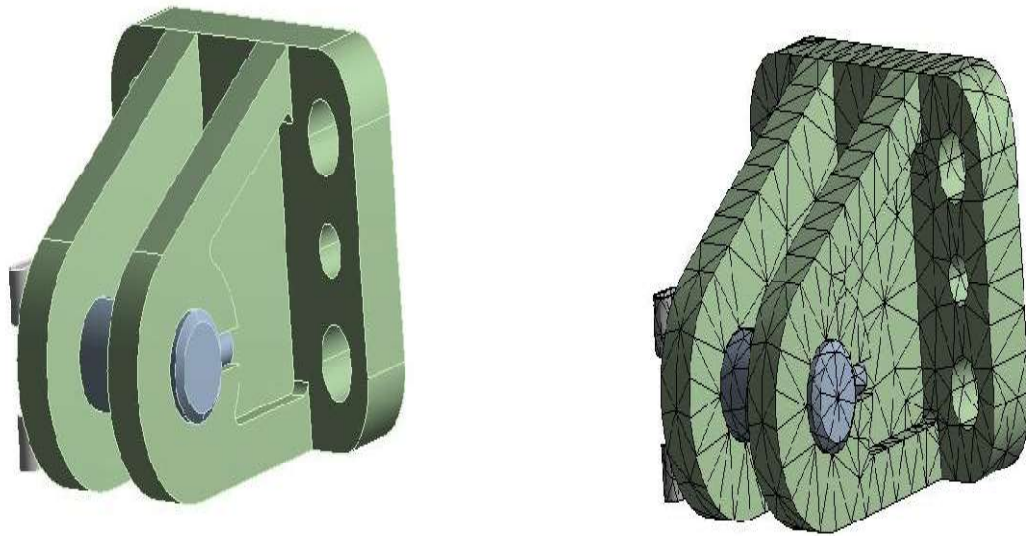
Part drawing and meshing of Clevis foot mounting
